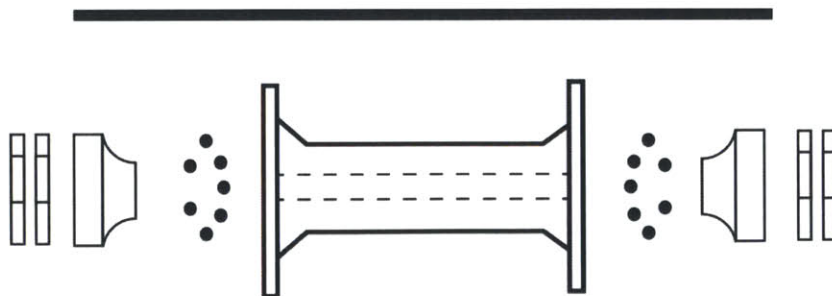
Diagram of the hub, bearings, bearing cone, double lock nuts and axle.
